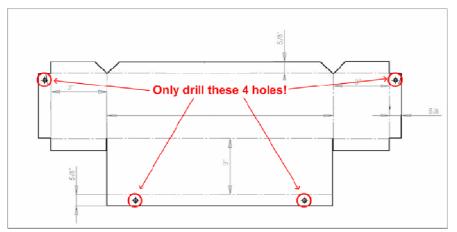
Step 2 holes- Only mark and drill holes in the four holes shown in Drawing 3.
